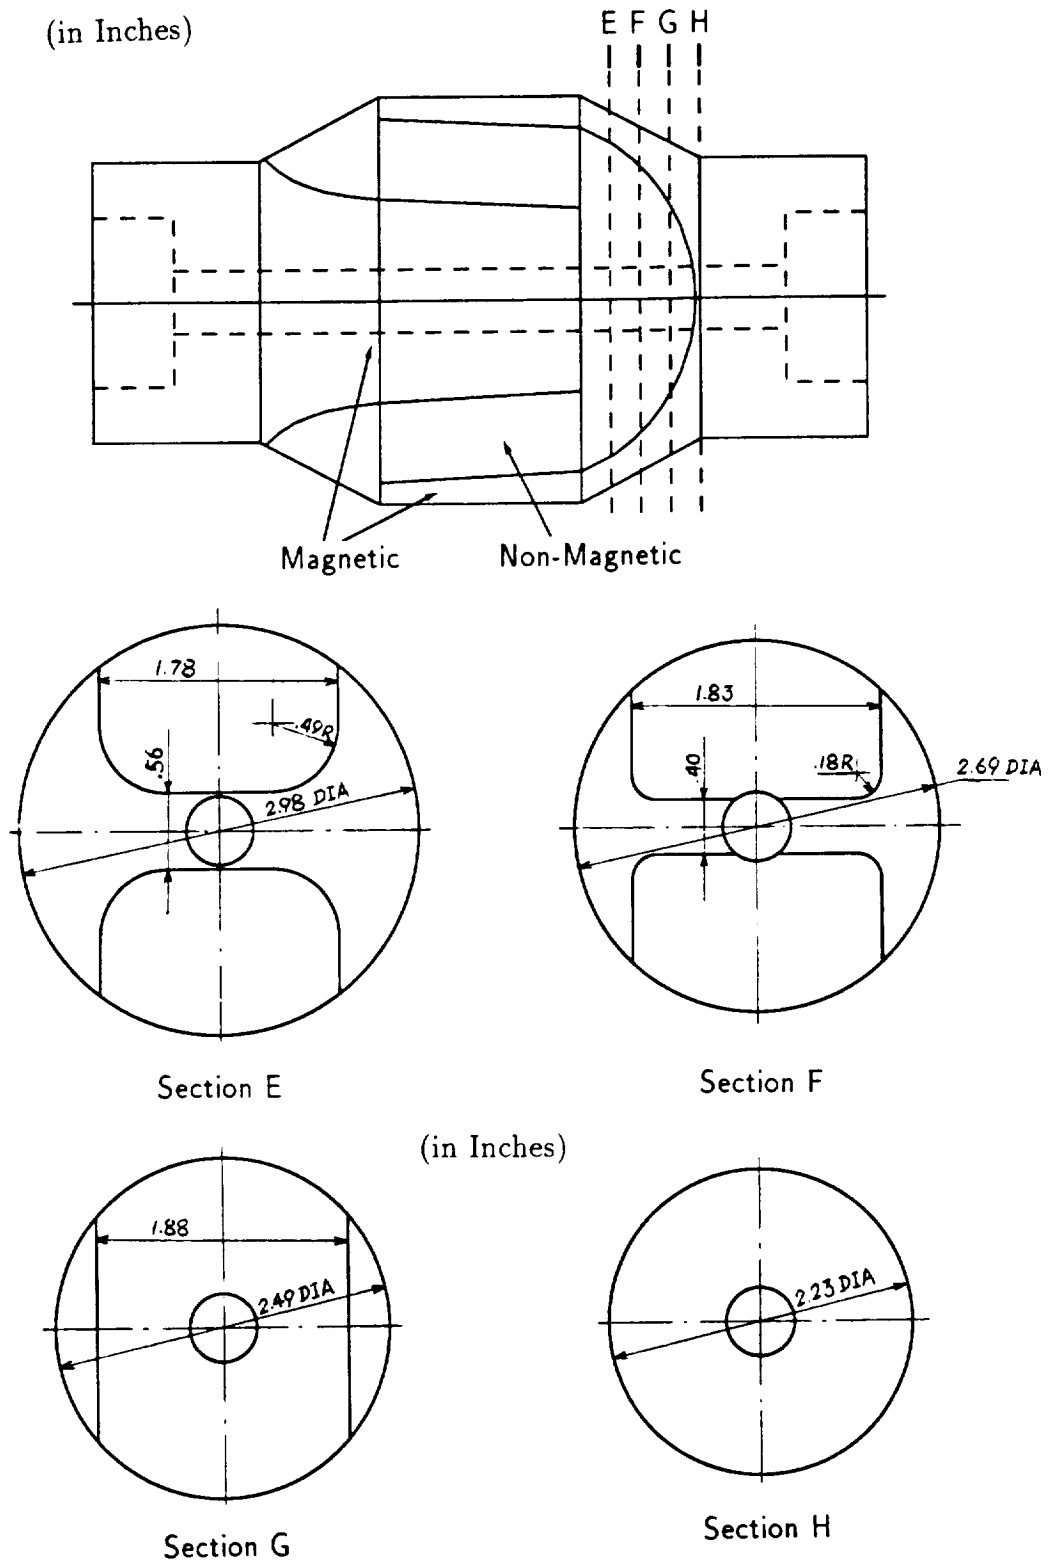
Dimensions of the Bimetallic Rotor
